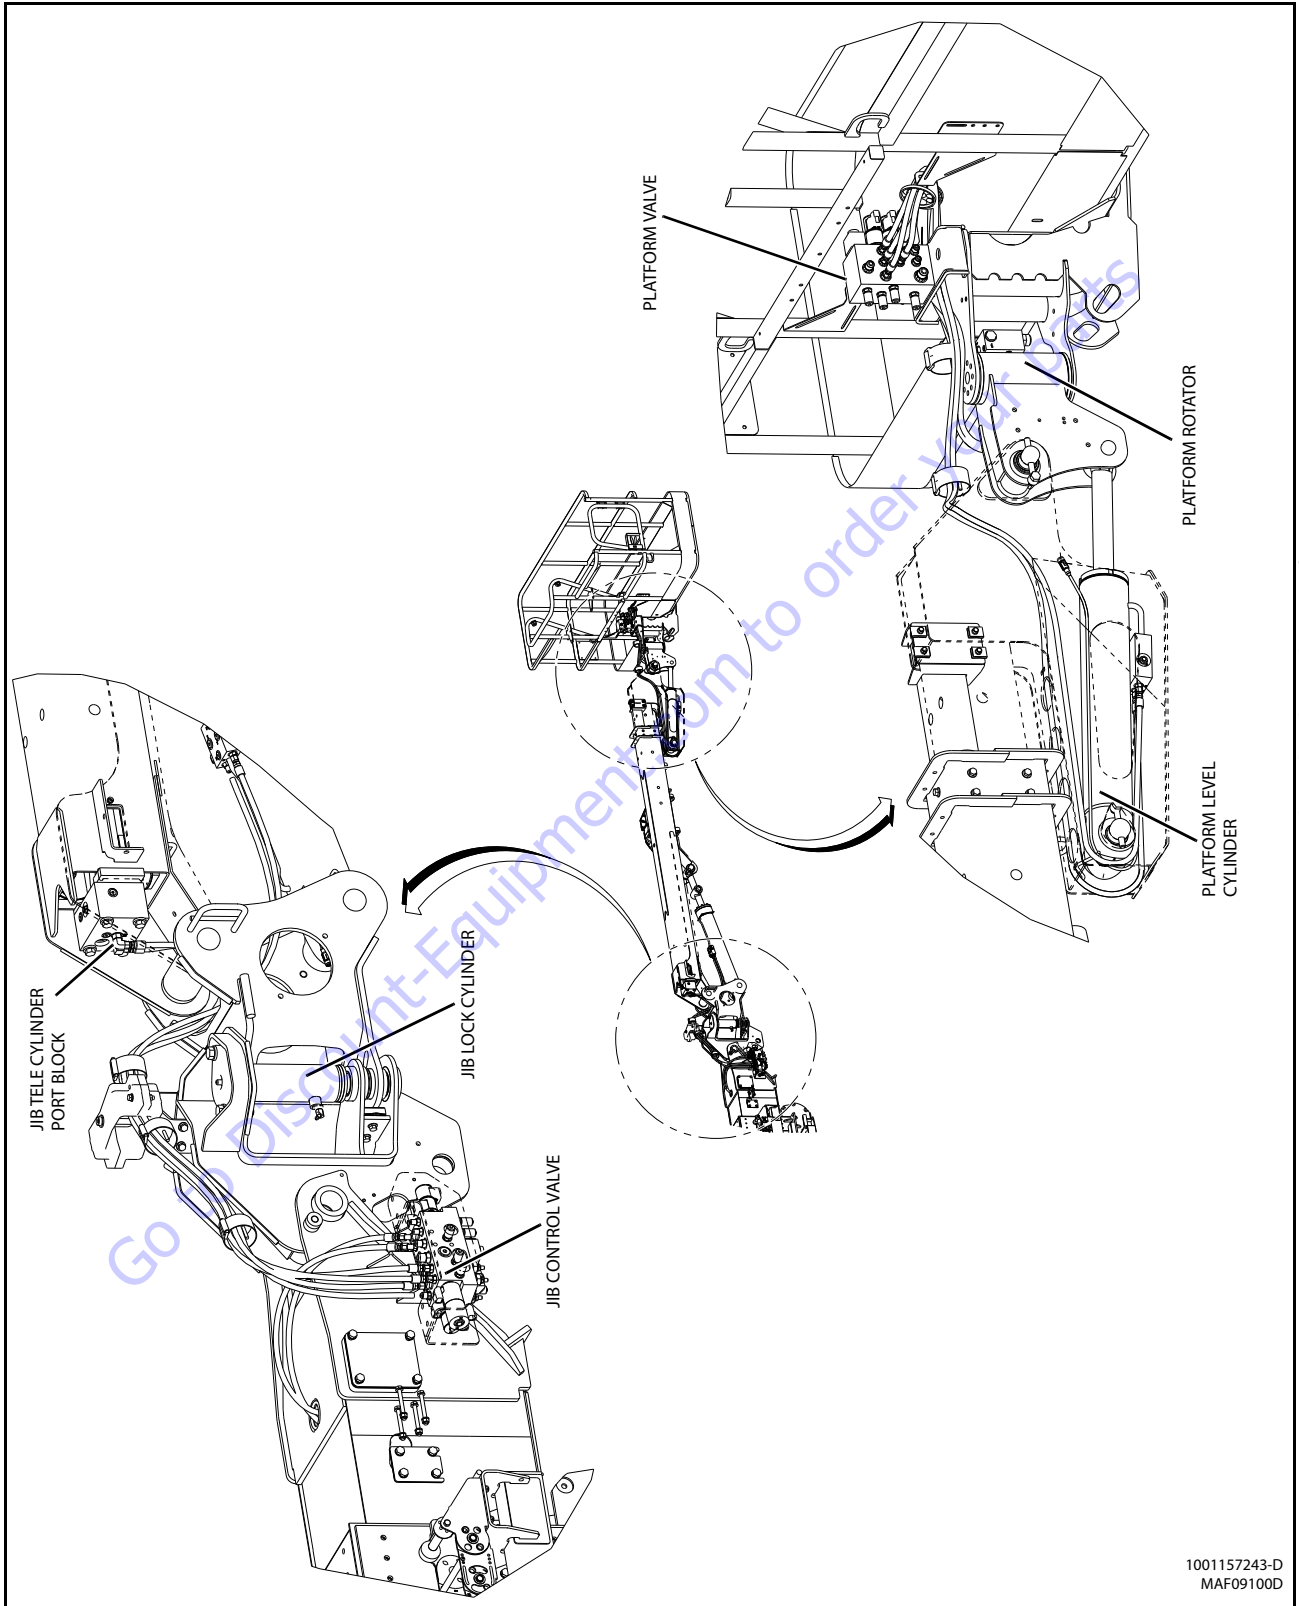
Jib Hydraulics - Sheet 3 of 7
